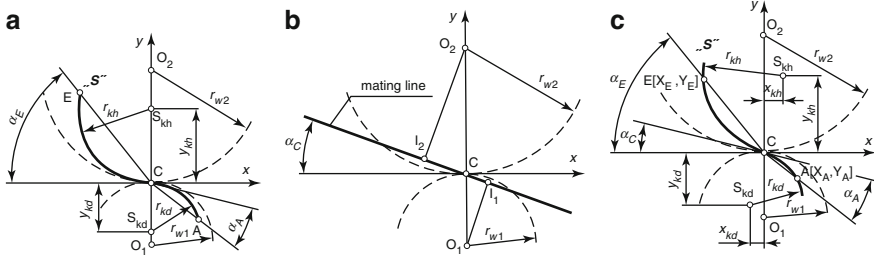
Characteristic of the mating line defining the: (a) cycloid gearing [2]; (b) involute gearing [2]; (c) planar C-C Gearing [3]
